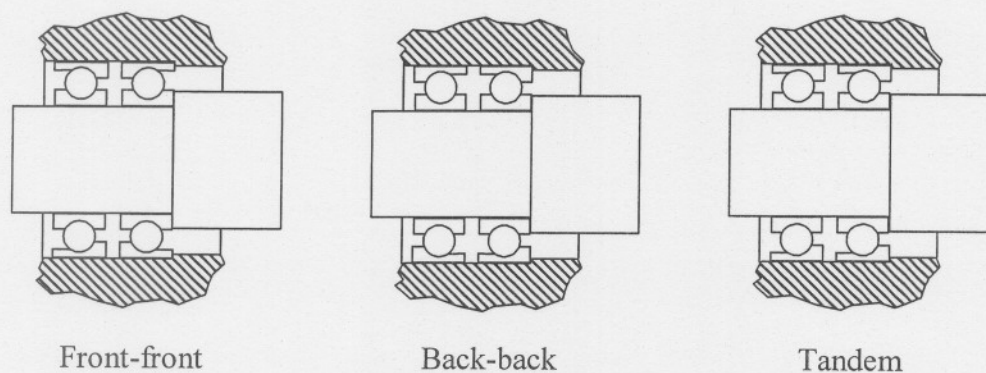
Angular contact bearing arrangements (Baines, 2005:119)
